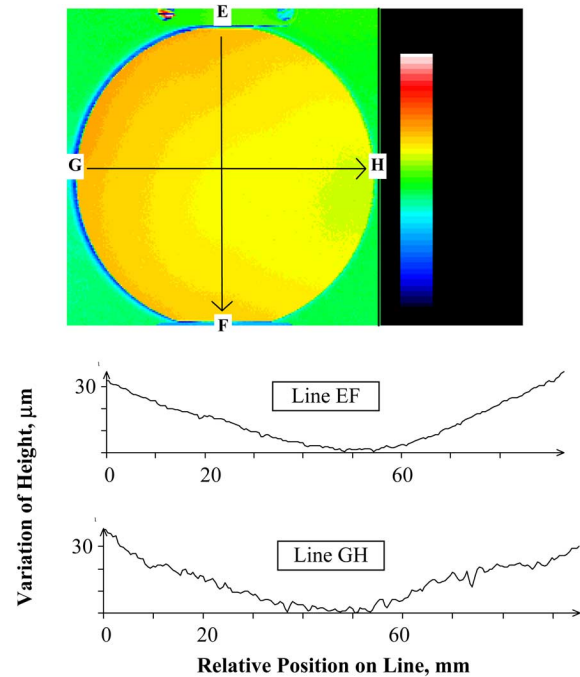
Laser surface imaging profile of wafer fixture I: Surface variation of wafer in pocket drawn down by vacuum.
